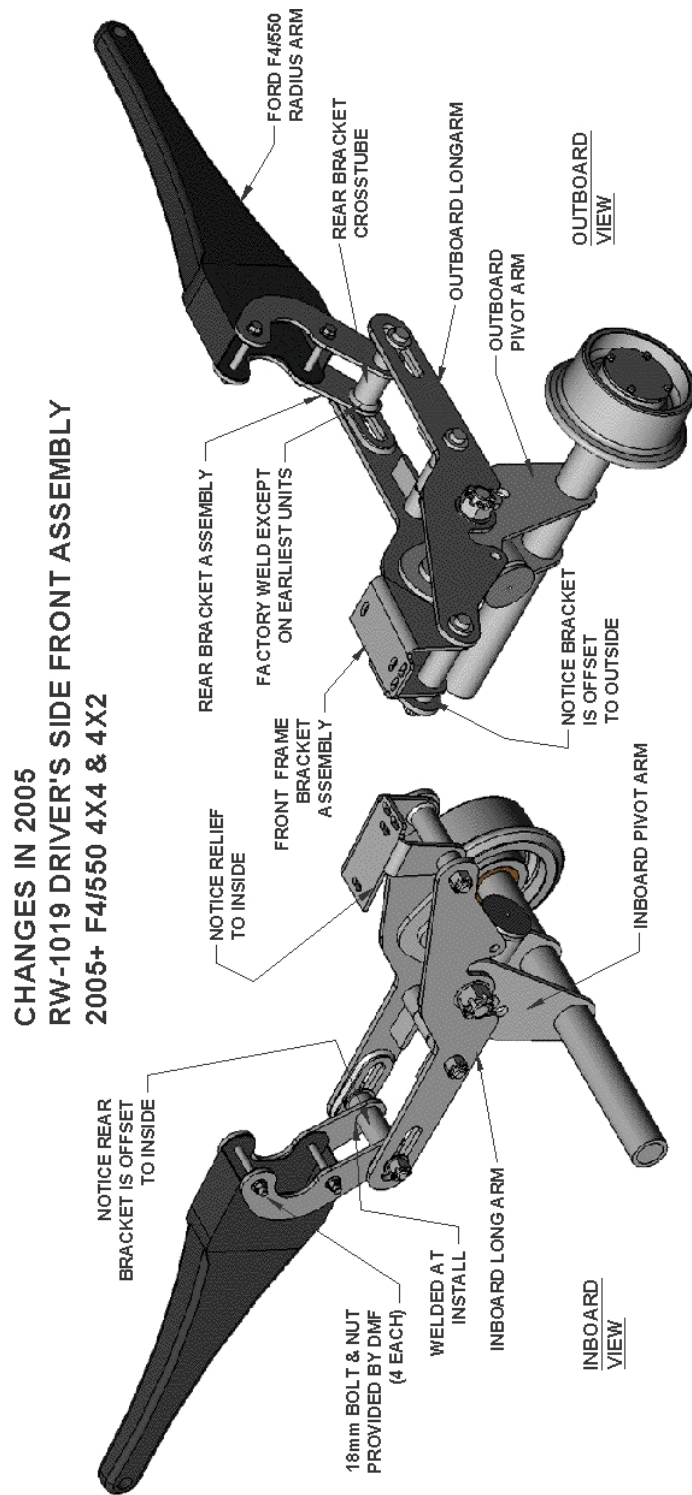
RW-1019 for '05 F4/550 Assembly Details
